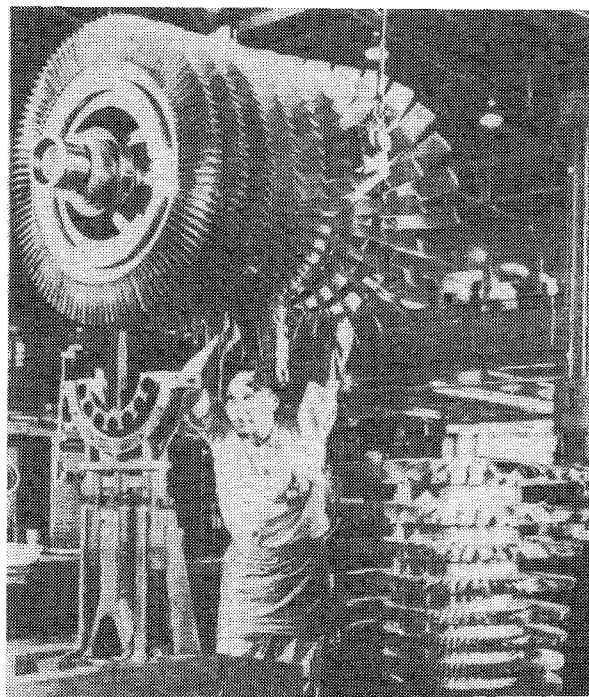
Compressor section of Pratt & Whitney J-57 engine.
